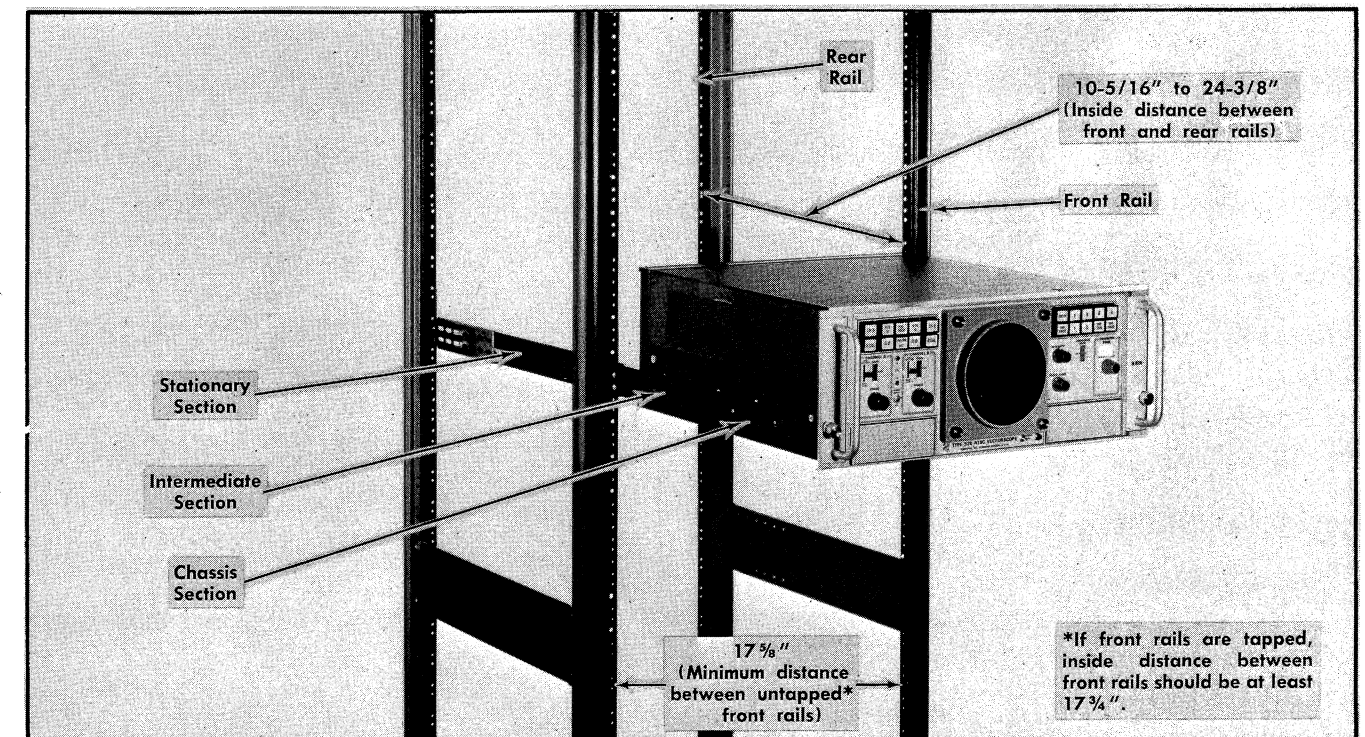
The Type R520 shown in the fully extended position. The cabinet sides have been removed from the rack to show mounting details.
